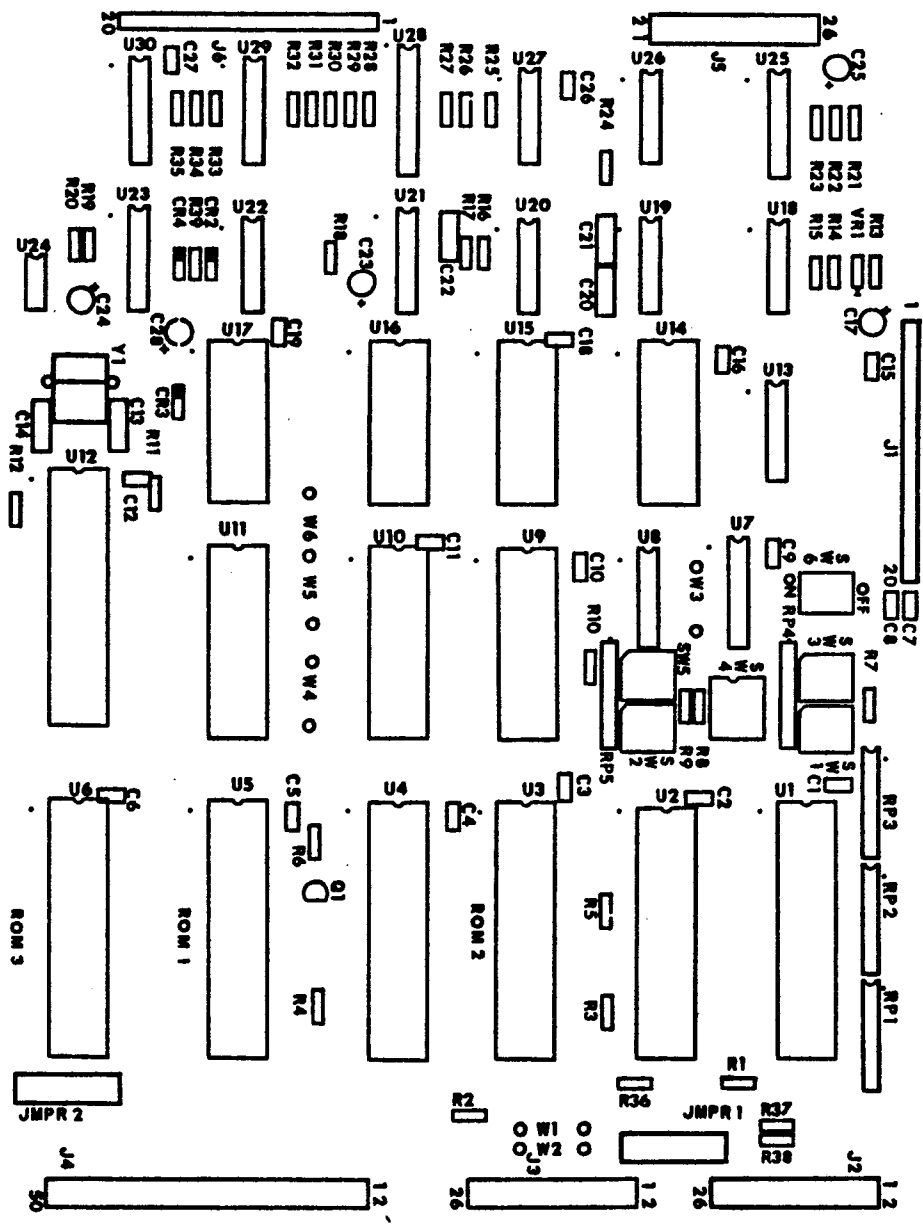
ASSEMBLY DRAWING - MICROPROCESSOR A3
